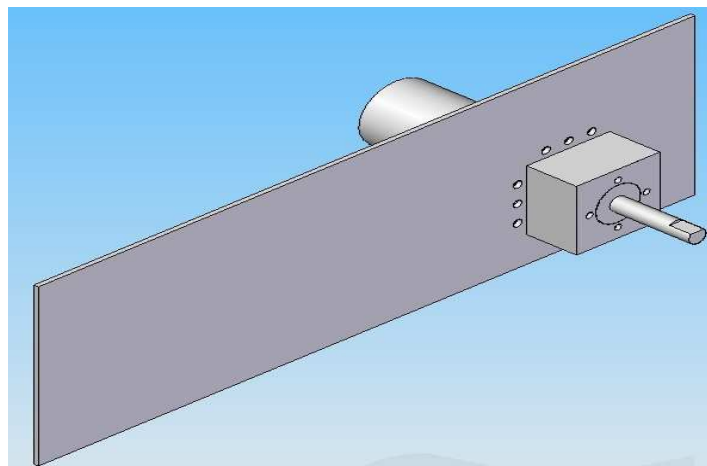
Rear Navigation Assembly Without Wheel
